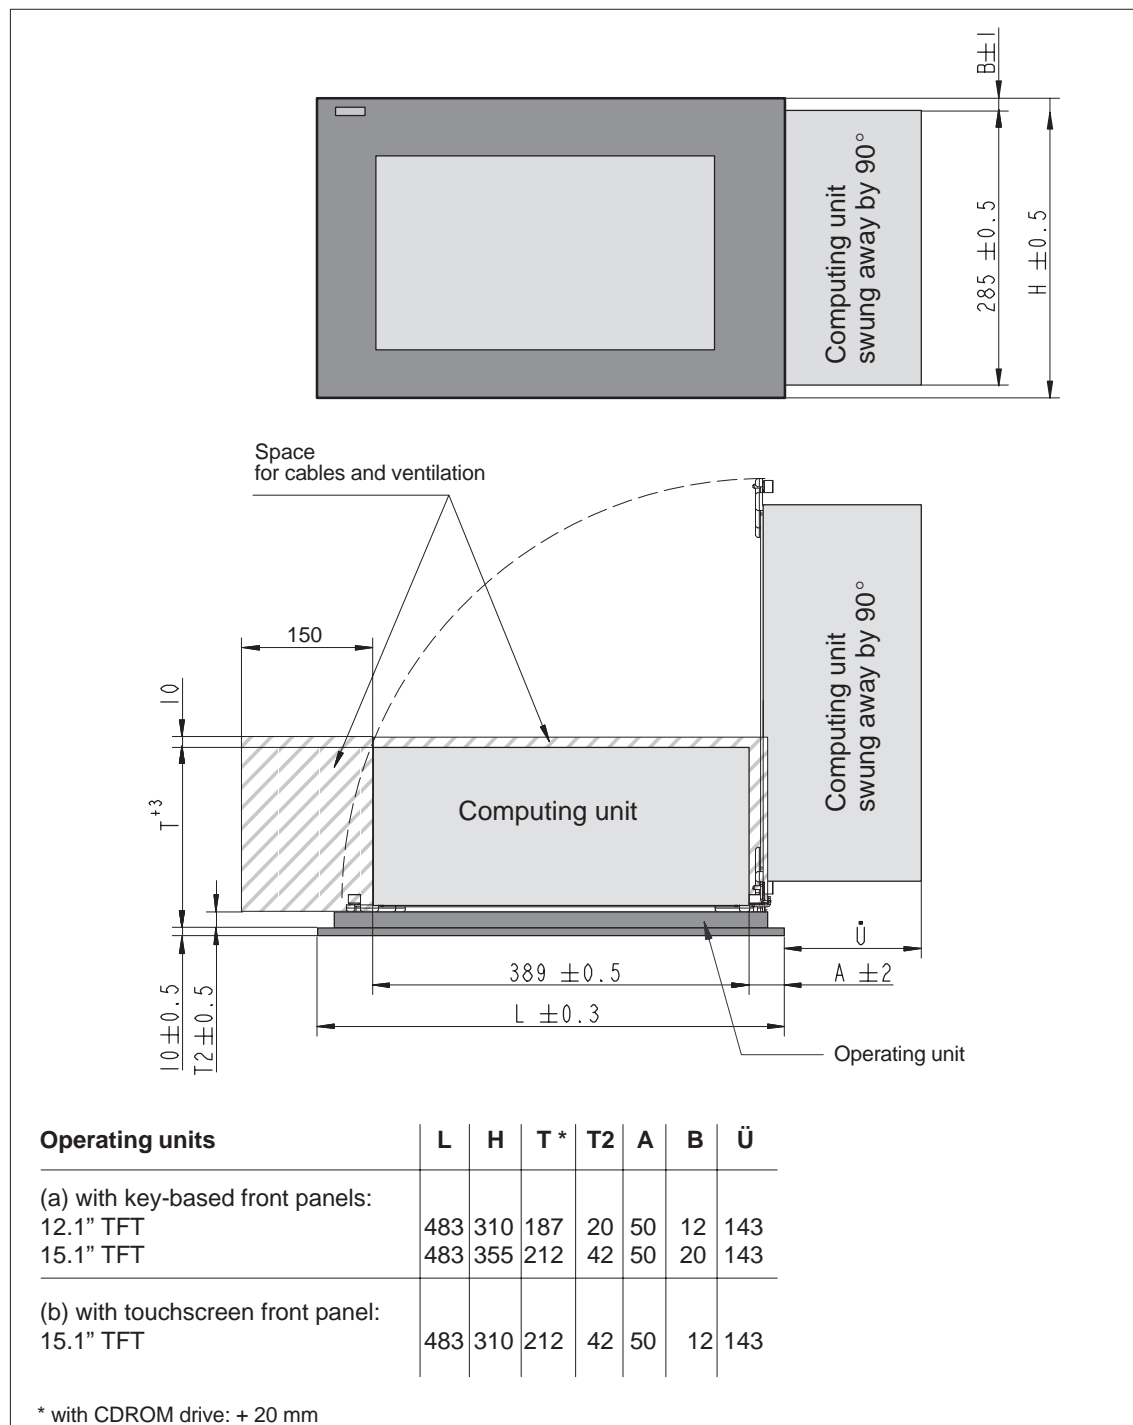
Device dimensions Panel PC 870 (in mm); all dimensions without screw protrusions
